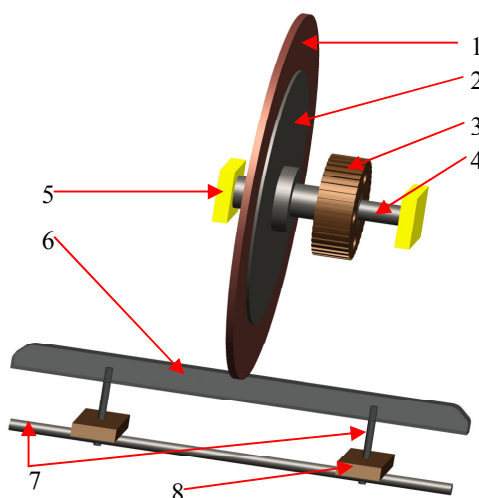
Thermal model of the copper disc – graphite skate power assembly (1 – copper disc; 2 – steel pressing piece; 3 – gear wheel; 4 – main shaft; 5 – end insulators; 6 – graphite skate; 7 – spindles; 8 - insulators)
